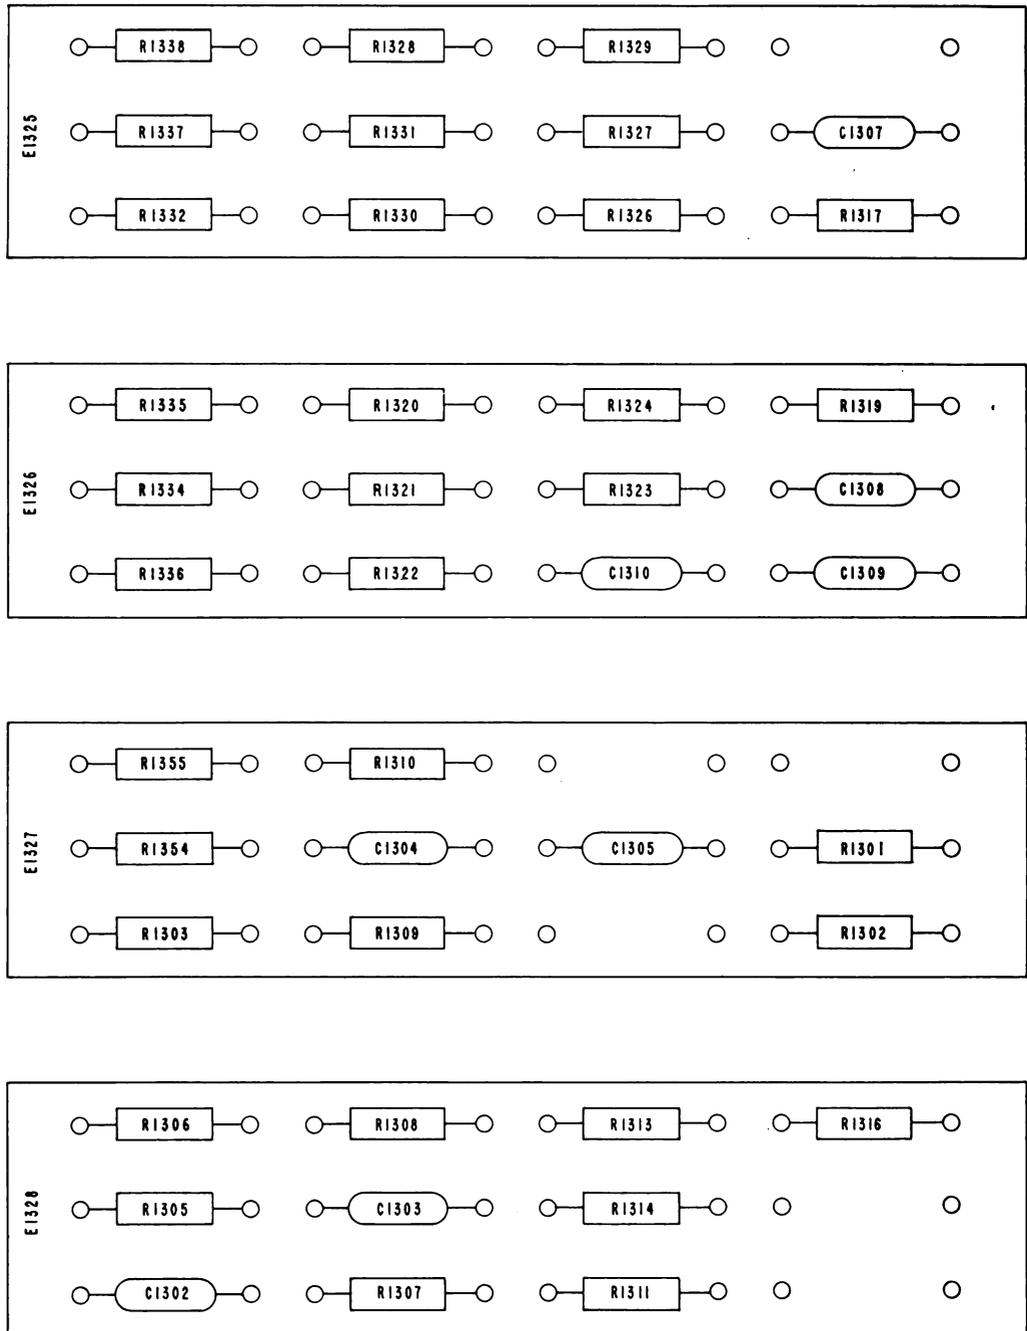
Components Location, Terminal Boards of Telegraph Carrier Receiver
